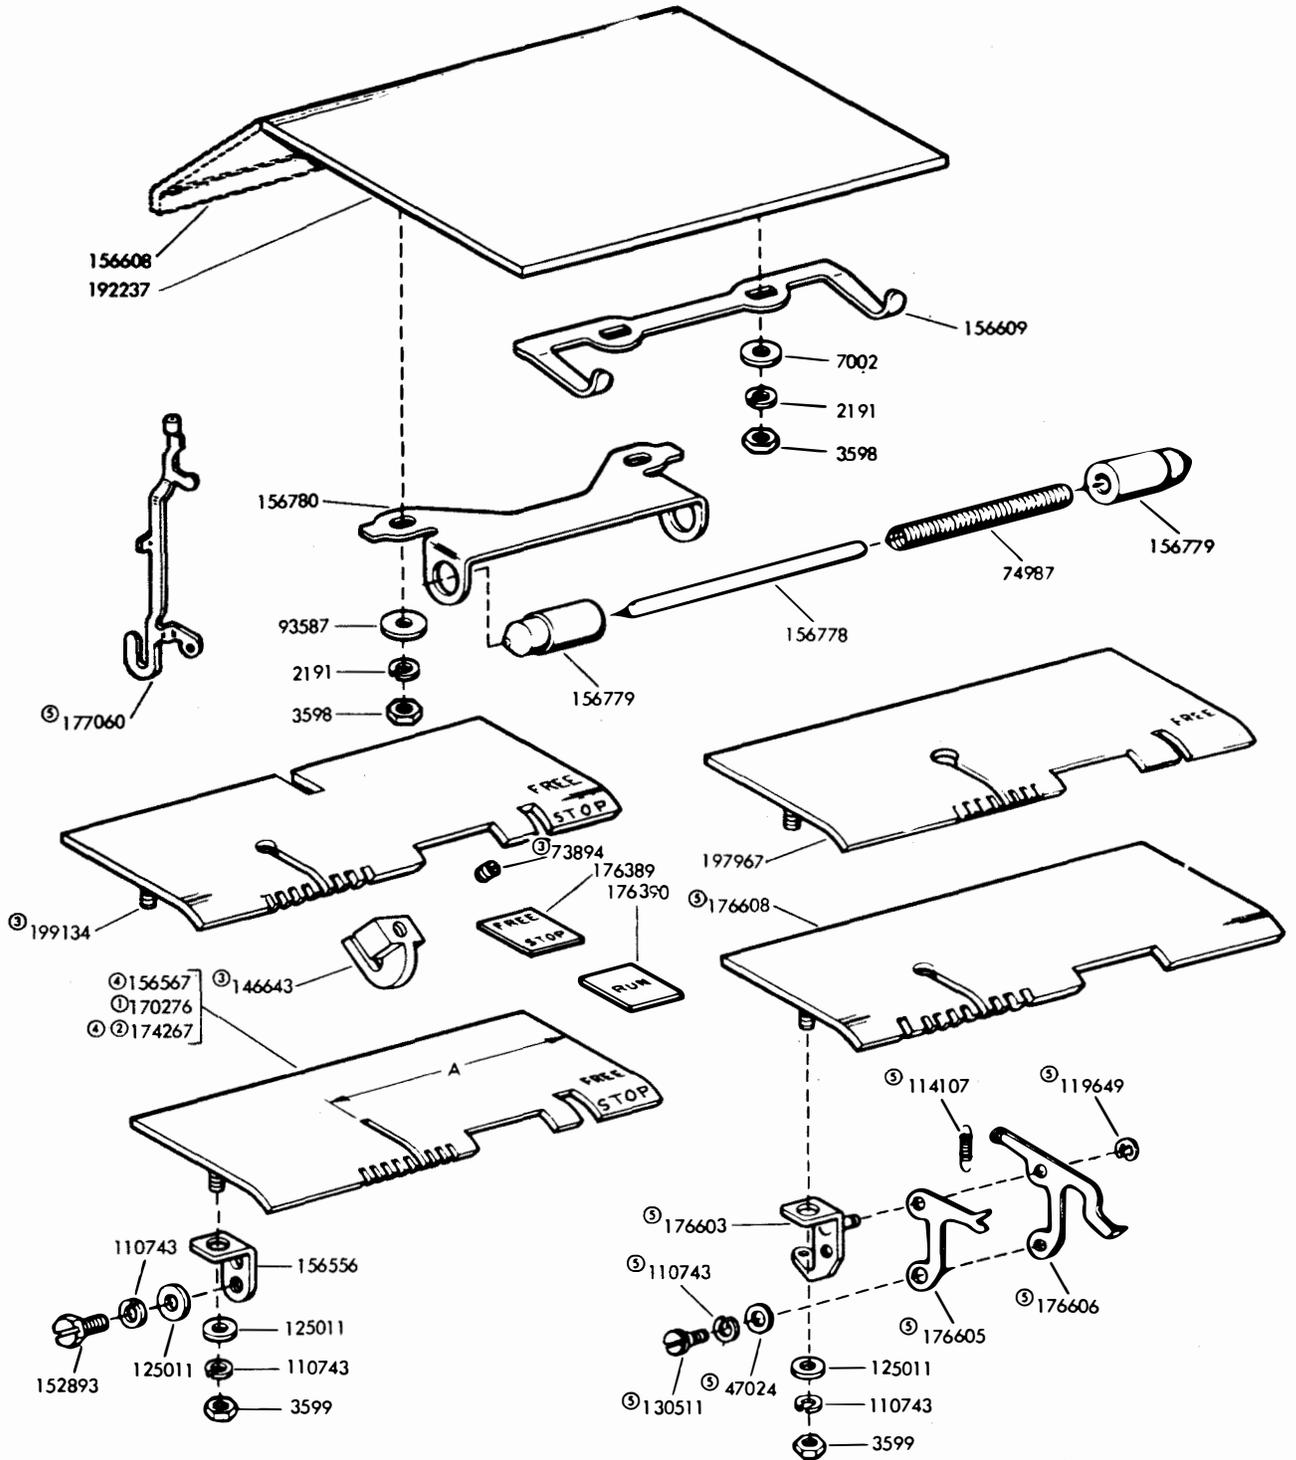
Tape Guide Plate Mechanisms (Sheet 3 of 3)
